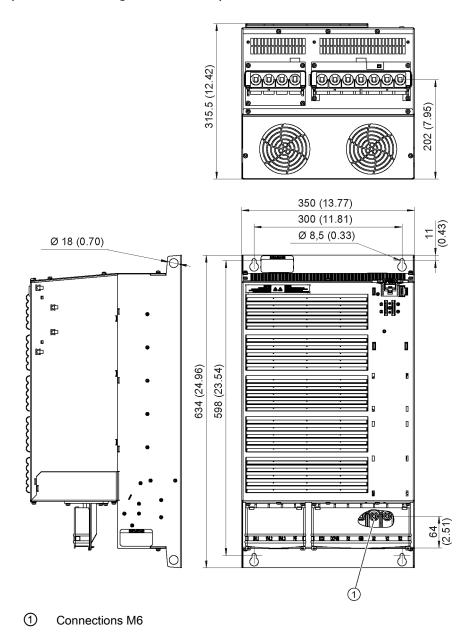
Dimension drawing, PM340 Power Module, frame size FSF (without integrated line filter); all dimensions in mm and (inches)
